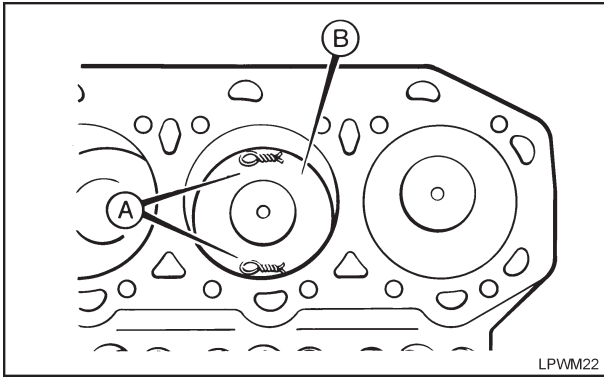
Checking Cylinder Head Clearance with Wire (an LPW head is shown)
